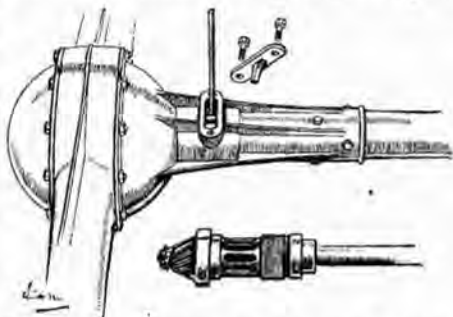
Adjustment for the bevel pinion, showing also the locking tongue on the cover plate.
